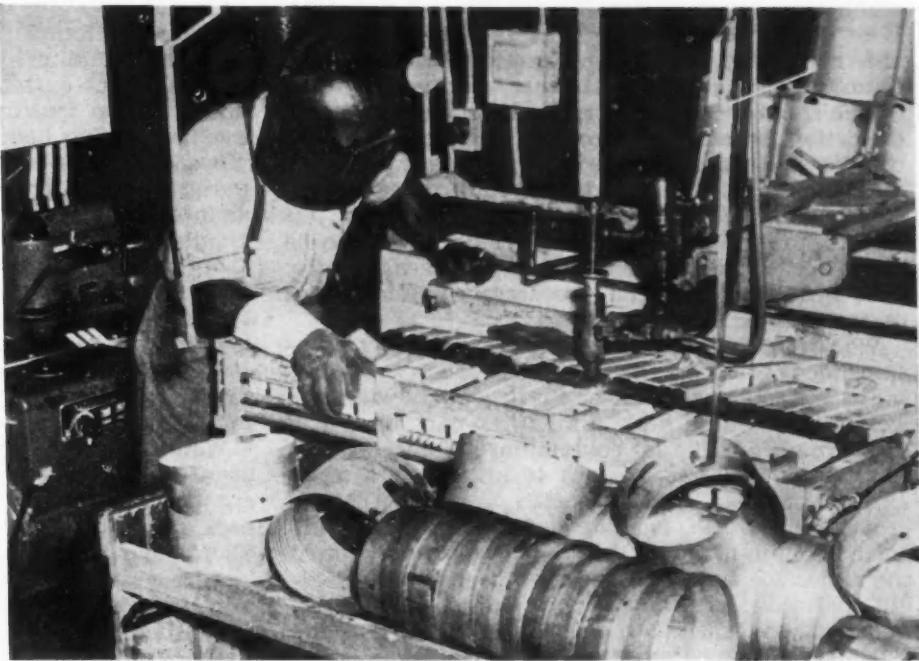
This diffusor assembly for a Westinghouse jet powerplant requires close manufacturing control because of the many stamping, welding, and machining operations on it
